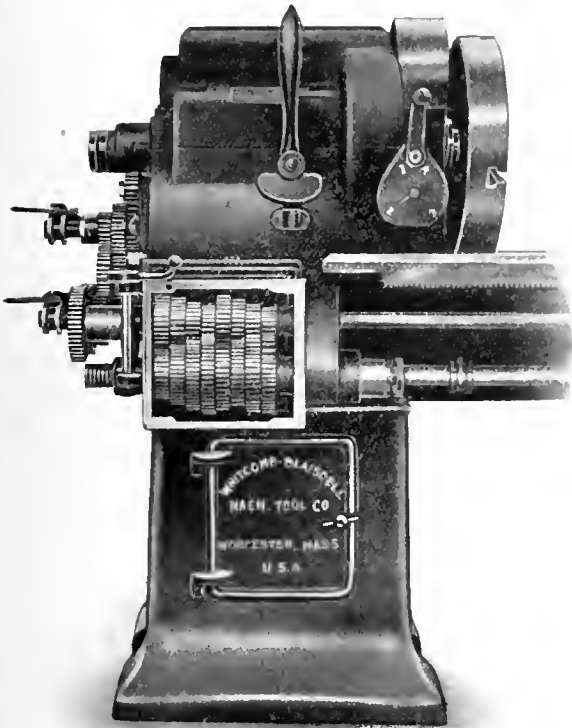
View of Head-stock End of Lathe, with Gear Covering Removed.
